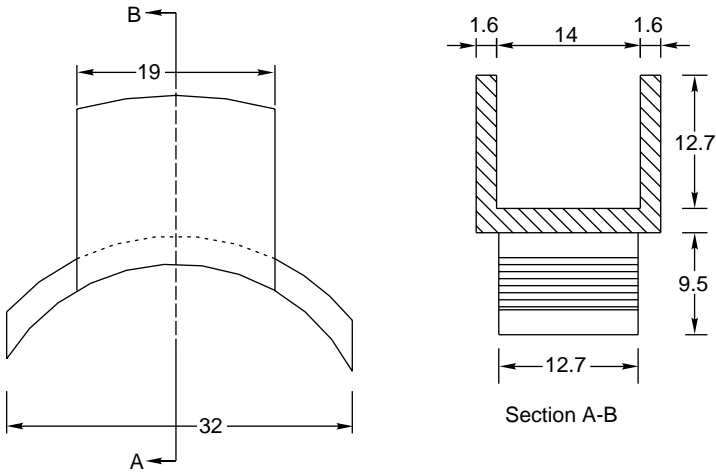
Mota Singh liner (all dimensions are in millimetres)
